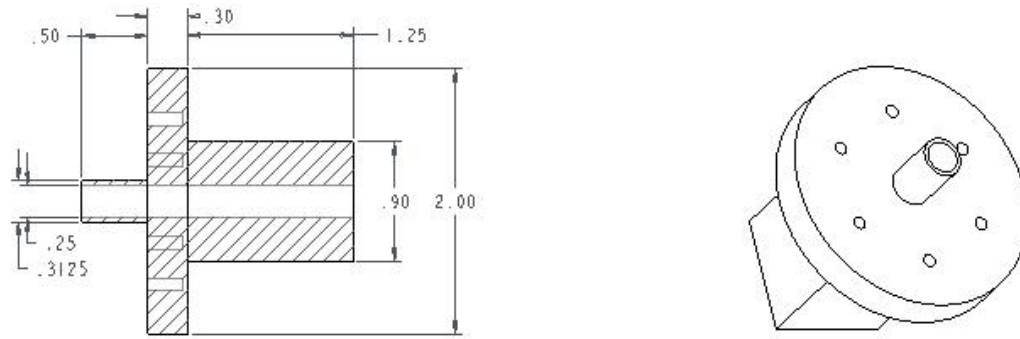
Detailed Right End Piece Drawing (Dimensions in Inches)
